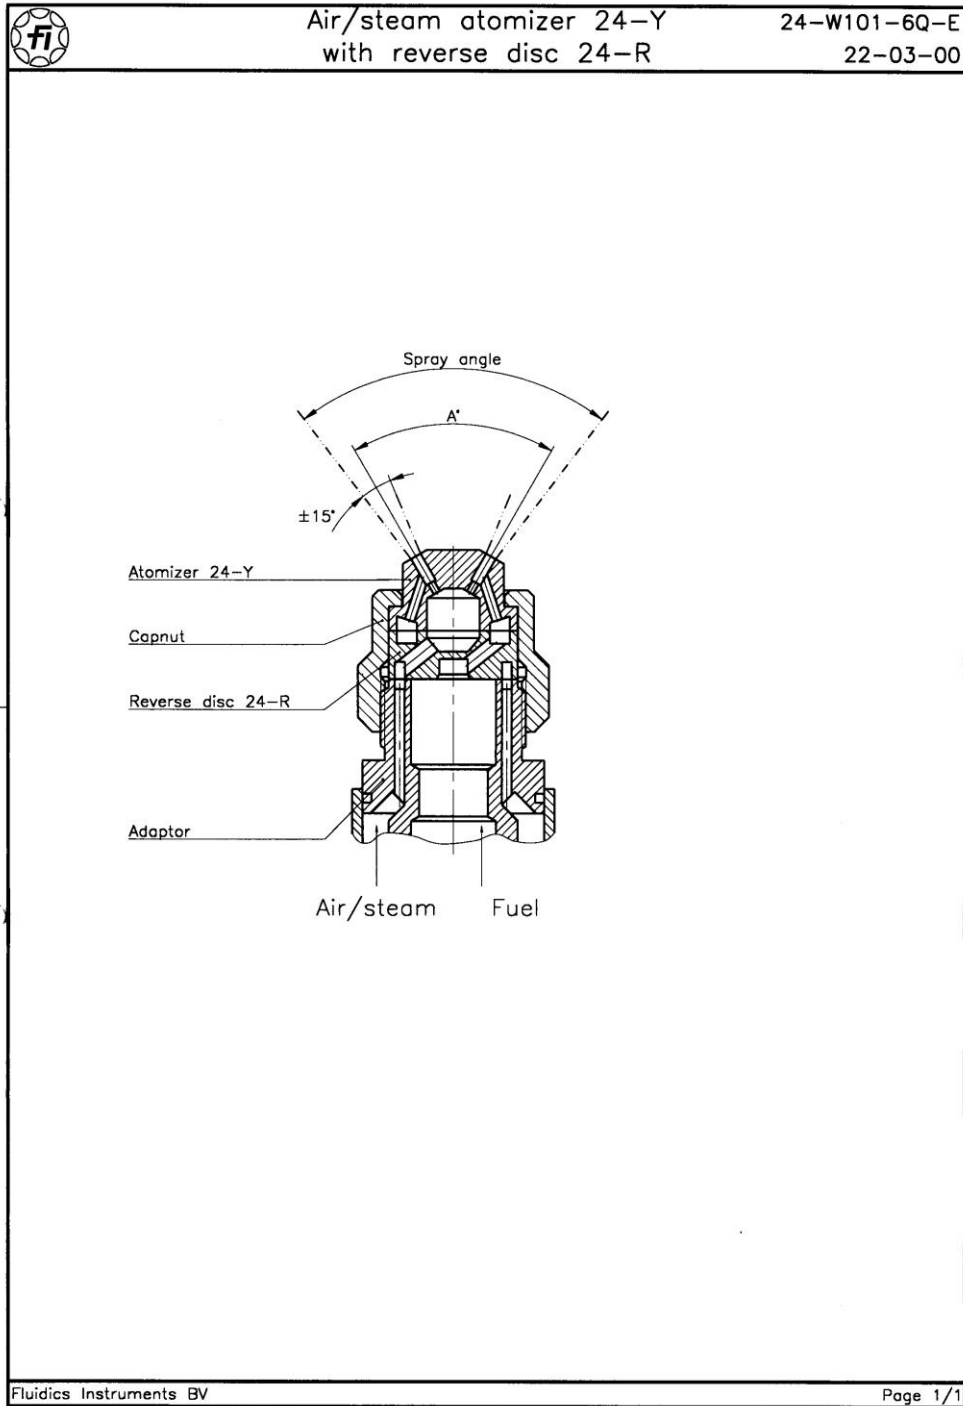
Air/steam atomizer 24-Y with reverse disc 24-R
